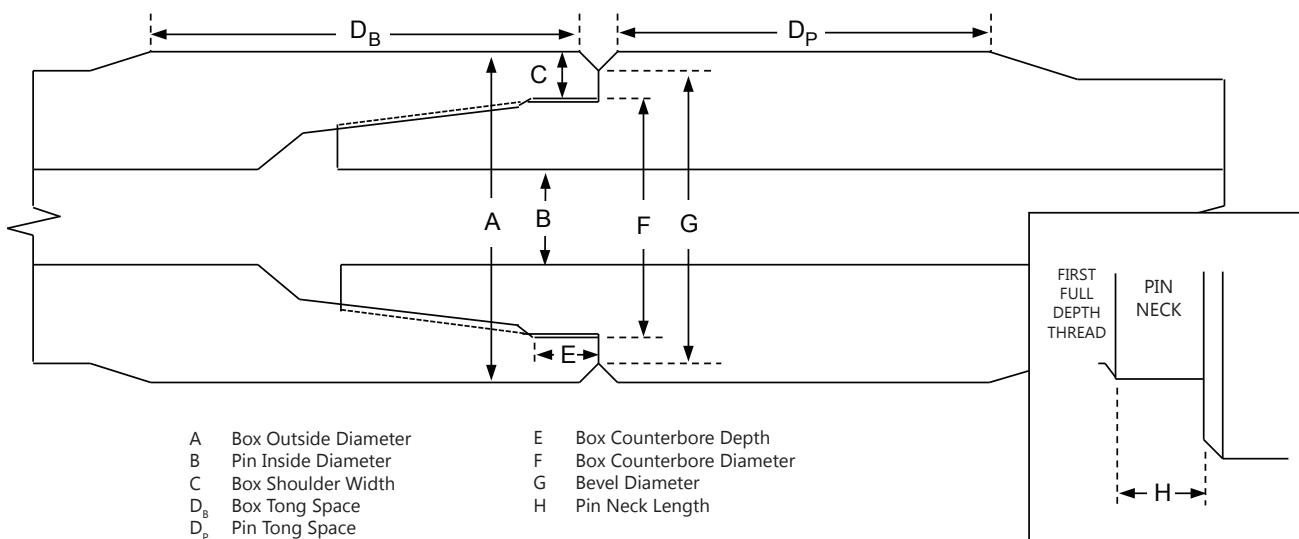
Tool joint dimensions for API and similar non-proprietary connections.
